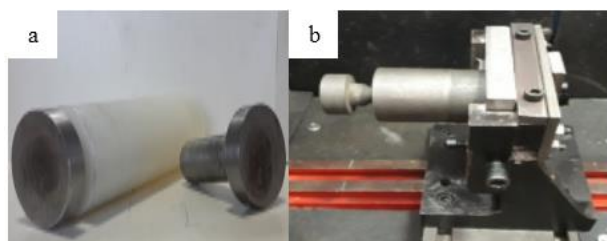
Equipment used in experiments: a) Impactor, b) die and punch fastened to holder in test chamber
